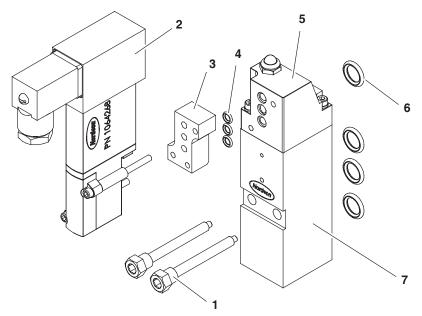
Key parts of a UM3 spray module (high-speed module with flange-mounted solenoid valve shown)
